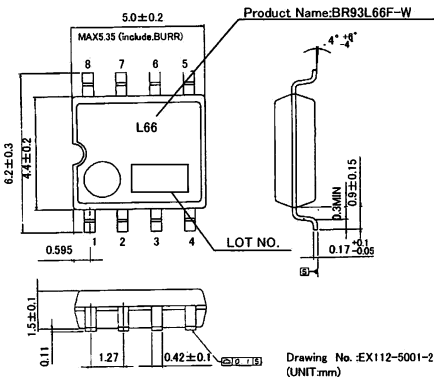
(c) PHYSICAL DIMENSION SOP8 (BR93L66F-W)
